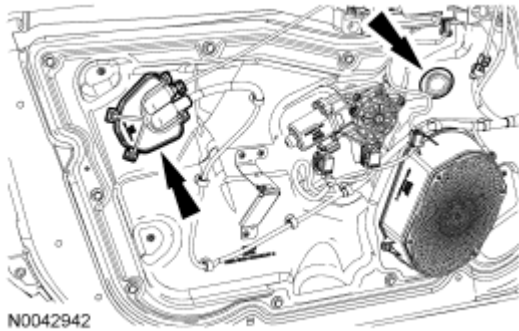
Locating Wiring Harness Cover Plate And Access Hole Plug
